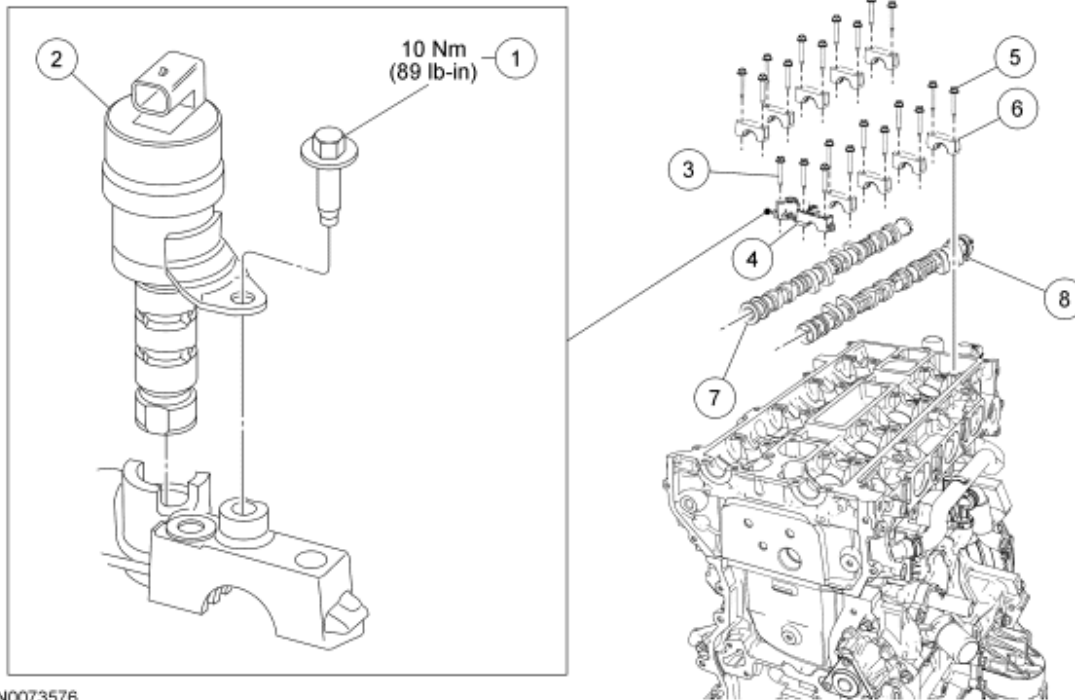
Exploded View Of Cylinder Head With Torque Specification (2 Of 3)
